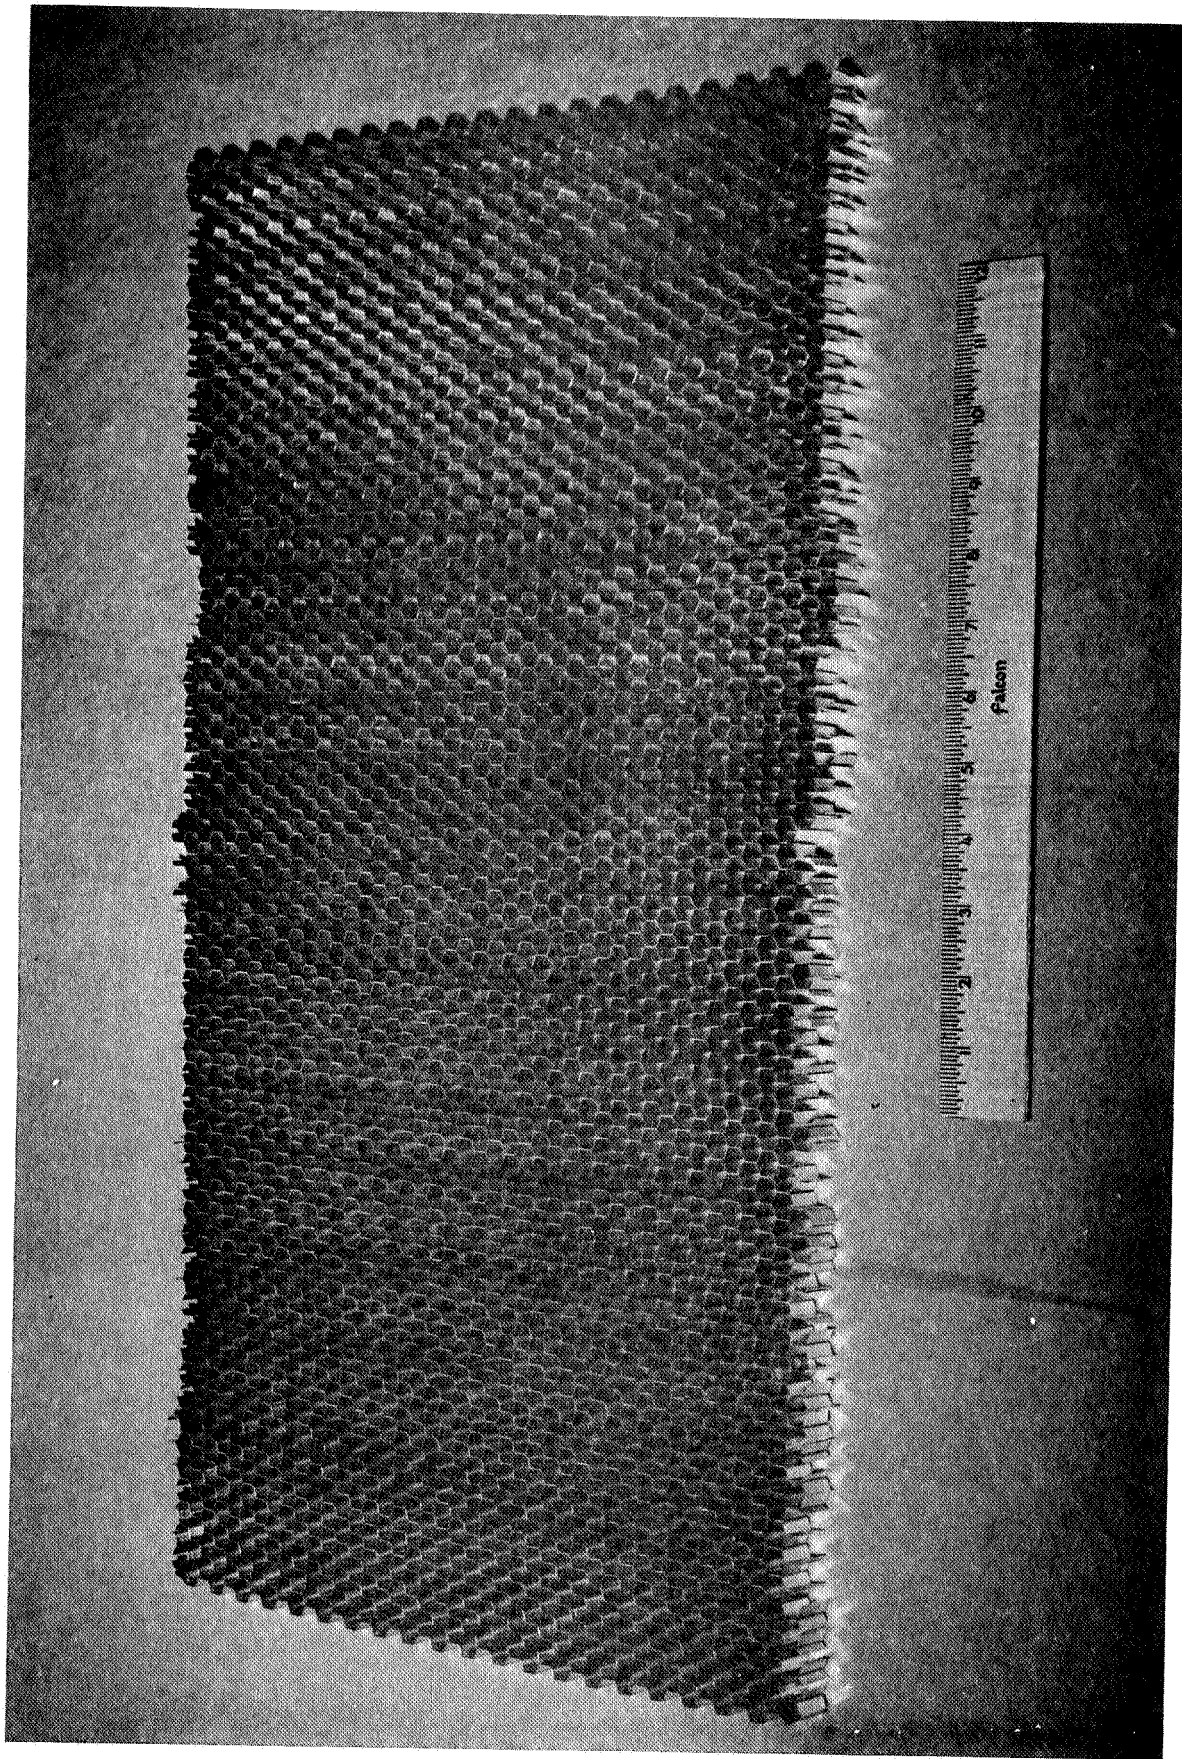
Resistance Welded Honeycomb Core Blanket shown prior to Trimming.
